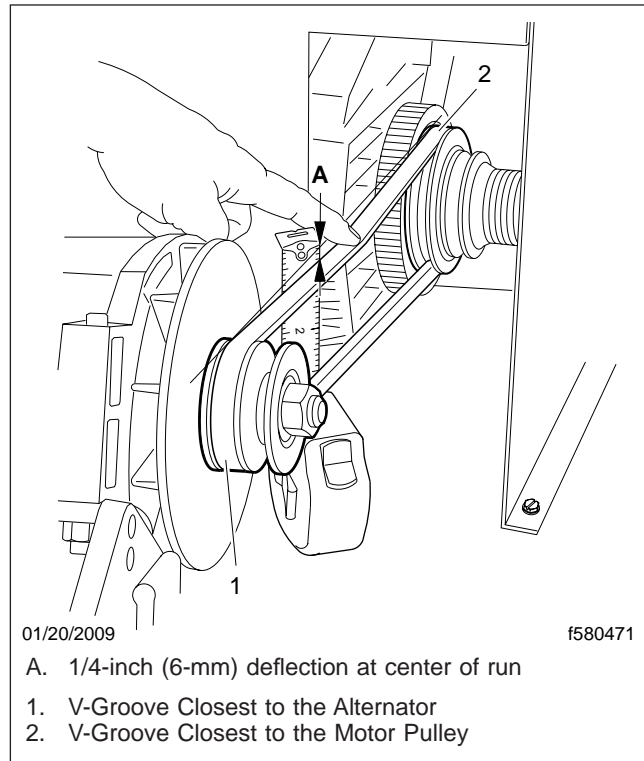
, Belt Deflection with Alternator Mounted on Tester
